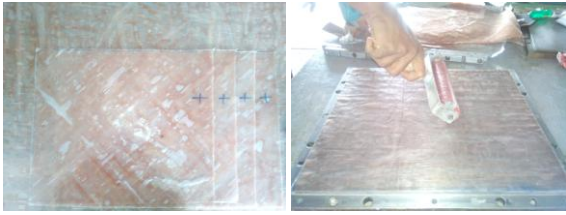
Nesting and Layup of Glass Fiber reinforced lamina
